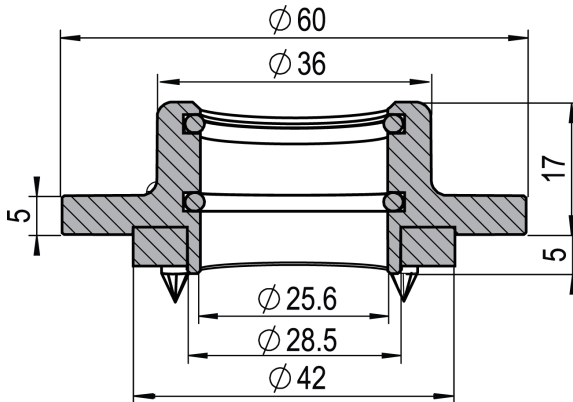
Optional Mounting Flange Accessory Dimensions, Cross Section
